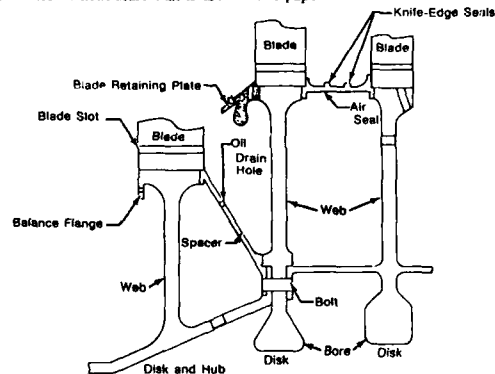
Composite Sketch Of Typical Rotor Components Of A Gas Turbine Engine
